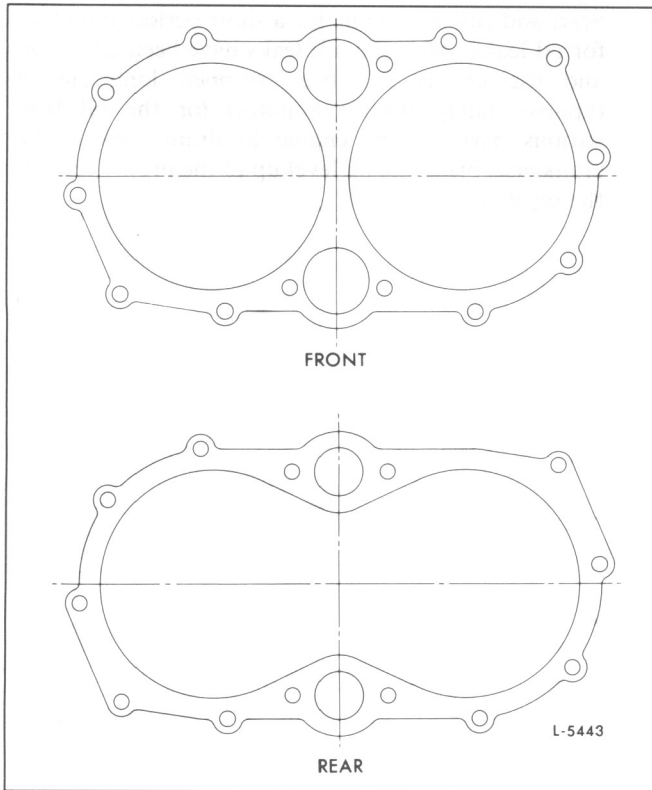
Cover Gaskets for Dual Tube Type Oil Cooler
